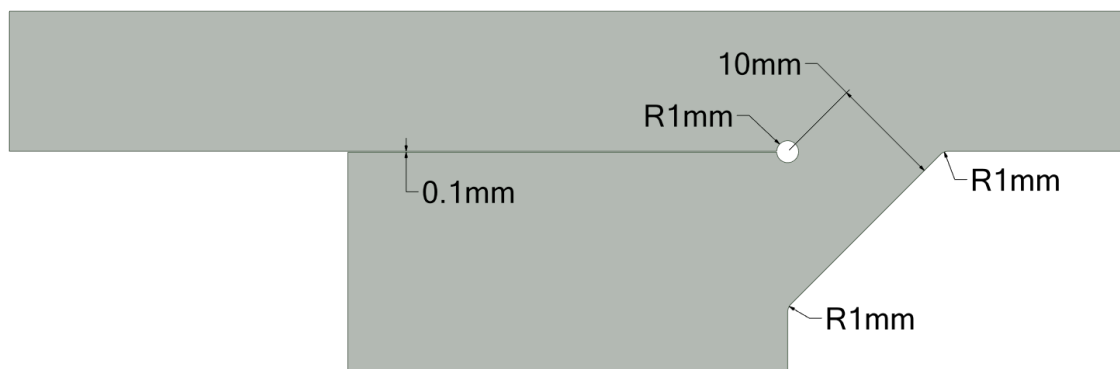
Analysis of CCS restraint fillet weld – Cross section of the fillet weld geometry
